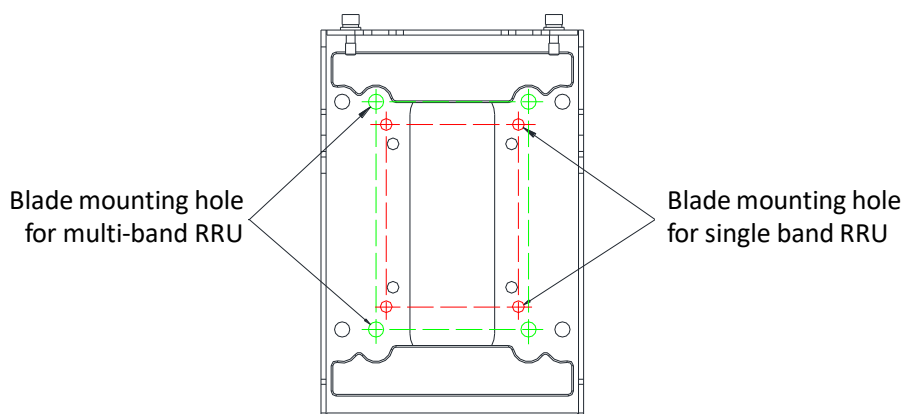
Bracket 1 Mounting Hole of Blade Mount
